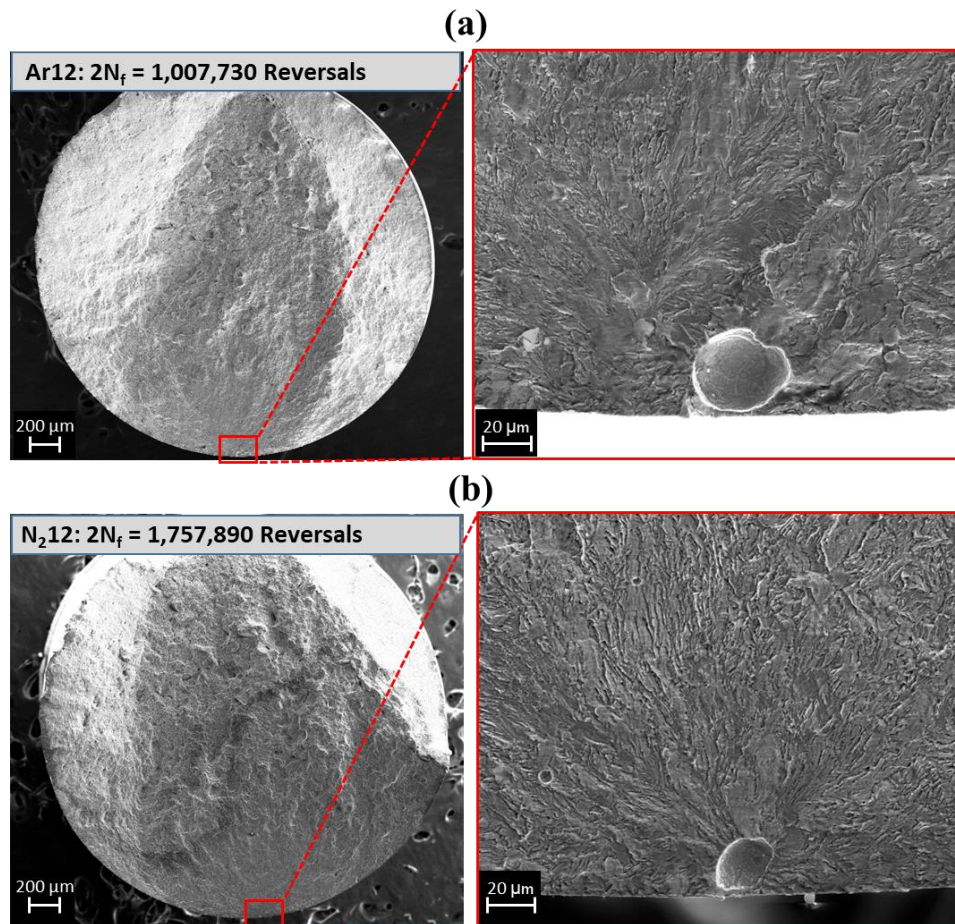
Fracture surfaces of L-PBF 17-4 PH SS specimens with uniform gage tested at 550 MPa: (a) specimen "Ar12" with 1,007,730 reversals to failure and (b) specimen "N₂12" with 1,757,890 reversals to failure.
